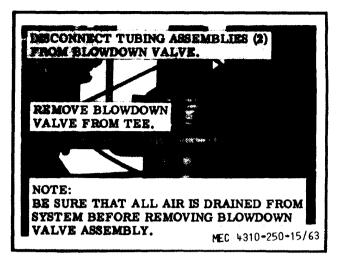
Blowdown Valve Assembly, Removal and Installation.
